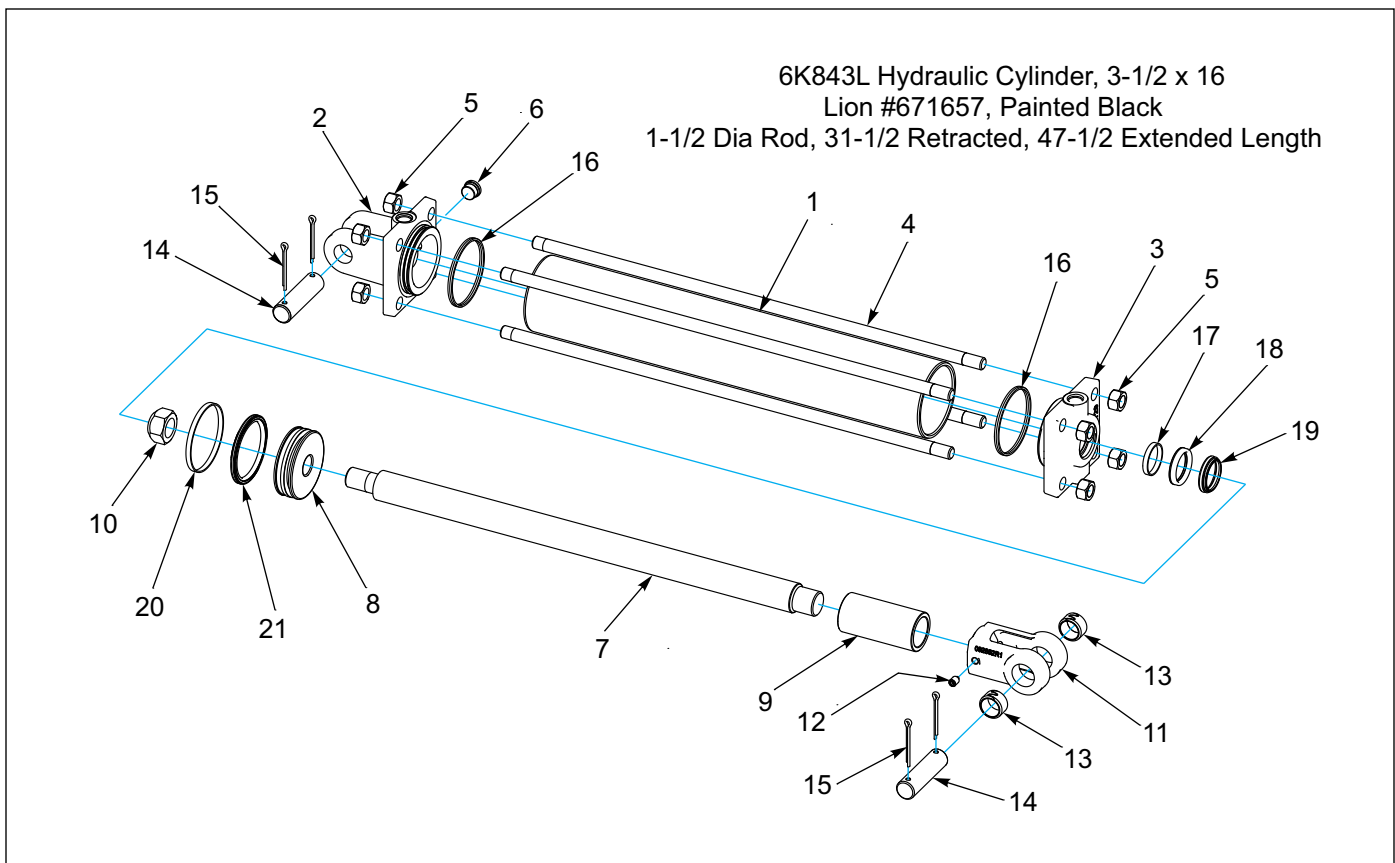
Hydraulic Cylinder Assembly - 3 1/2 X 16
